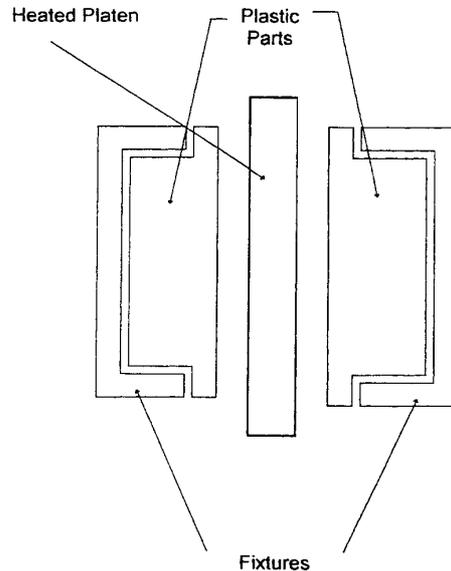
In direct hot plate welding, two fixtures press components into a hot, movable plate, causing the plastic to melt at the interface. Subsequent removal of the plate, application of pressure on the joint, and cooling time allows the welded joint to form and gain strength.
